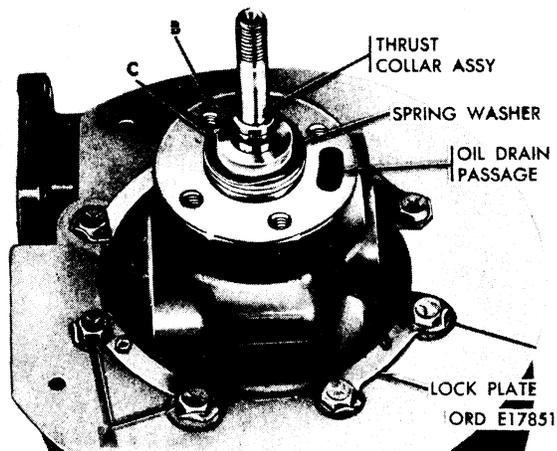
INSTALLING COMPRESSOR HOUSING GASKET AND SPRING WASHER ON THRUST COLLAR ASSEMBLY - TURBOCHARGERS 7748900 AND 10935279.
